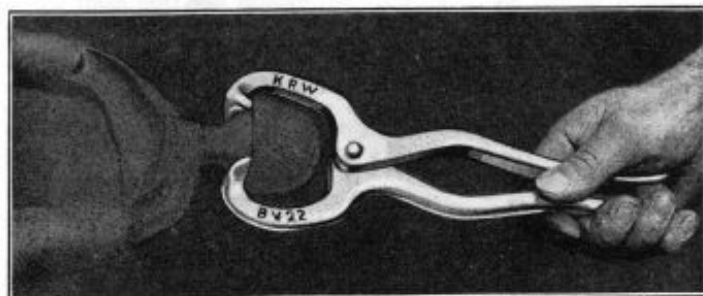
shows tool No. A305B pressing Timken roller bearing in place on differential housing.
